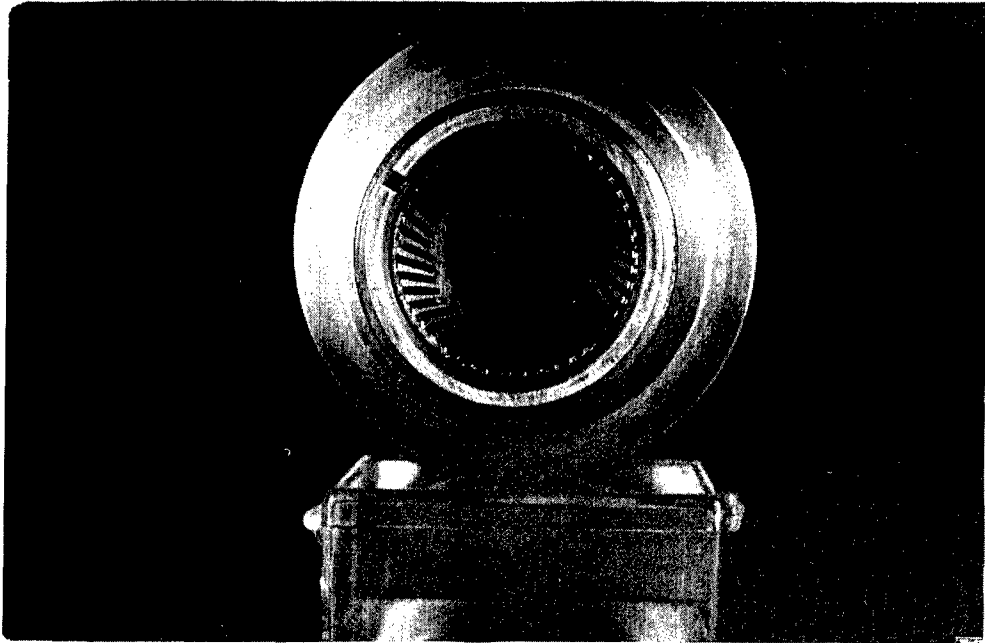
Heat Exchanger For No. 1 Journal After Brazing Into Rotor
